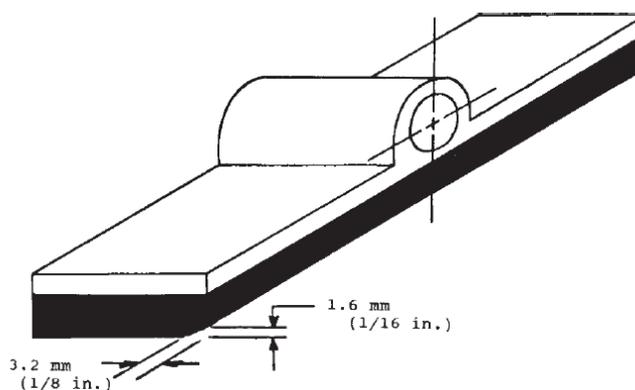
Slider Assembly Illustrating the Maximum Wear on Striking Edge
